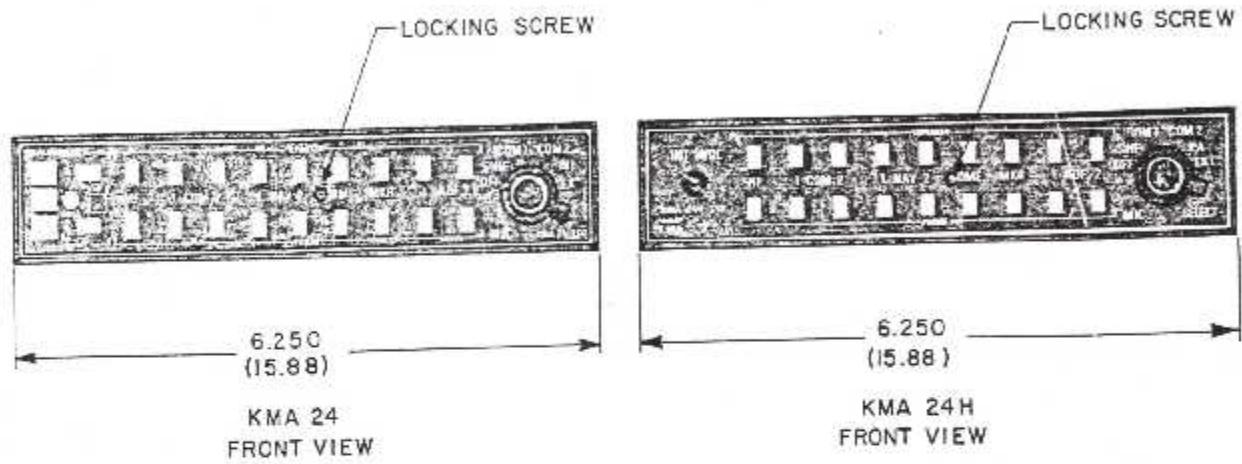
OUTLINE AND MOUNTING DRAWING
